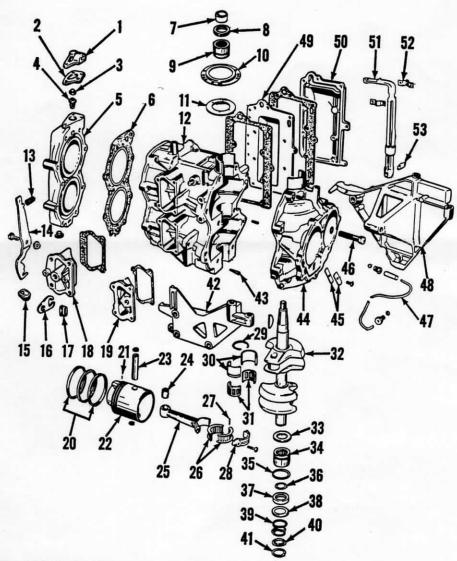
Late model power head. Early models are similar except thermostat is not used. Flat side of magneto armature plate retainer (11) should be toward top of motor.
